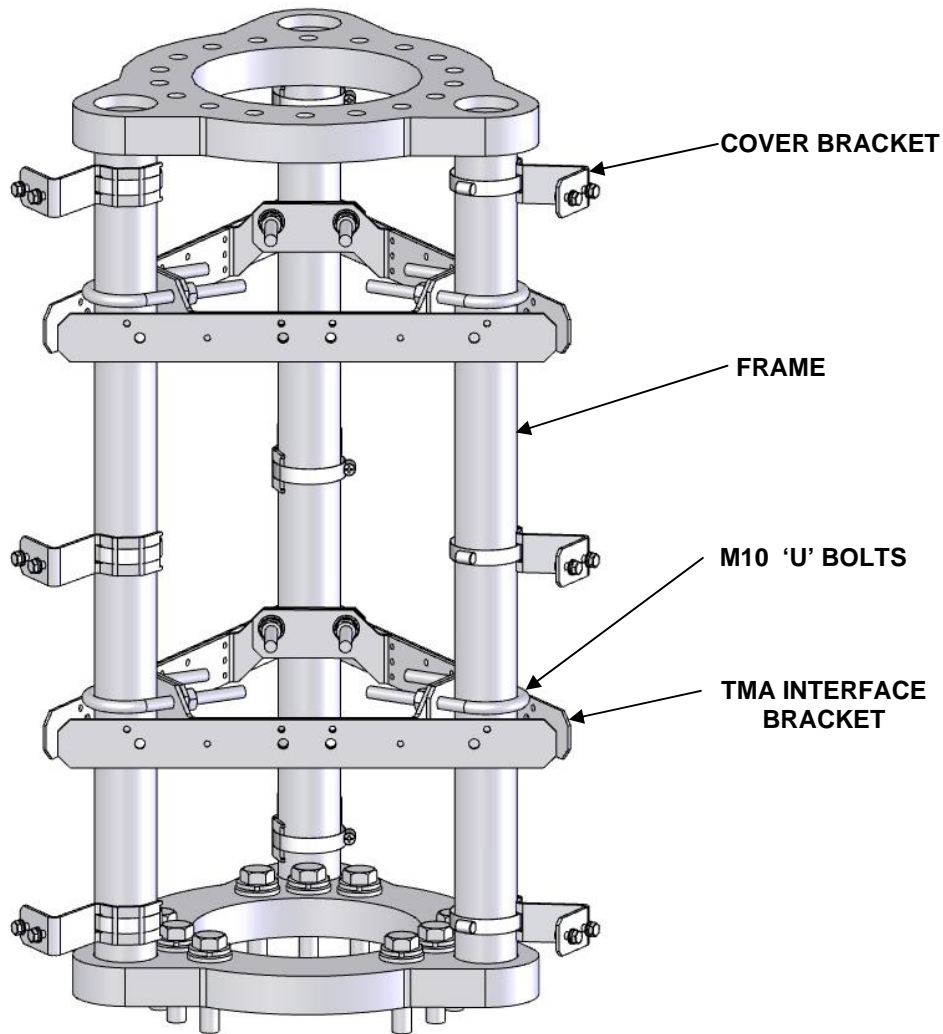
Interface plate required for mounting the headframe.
